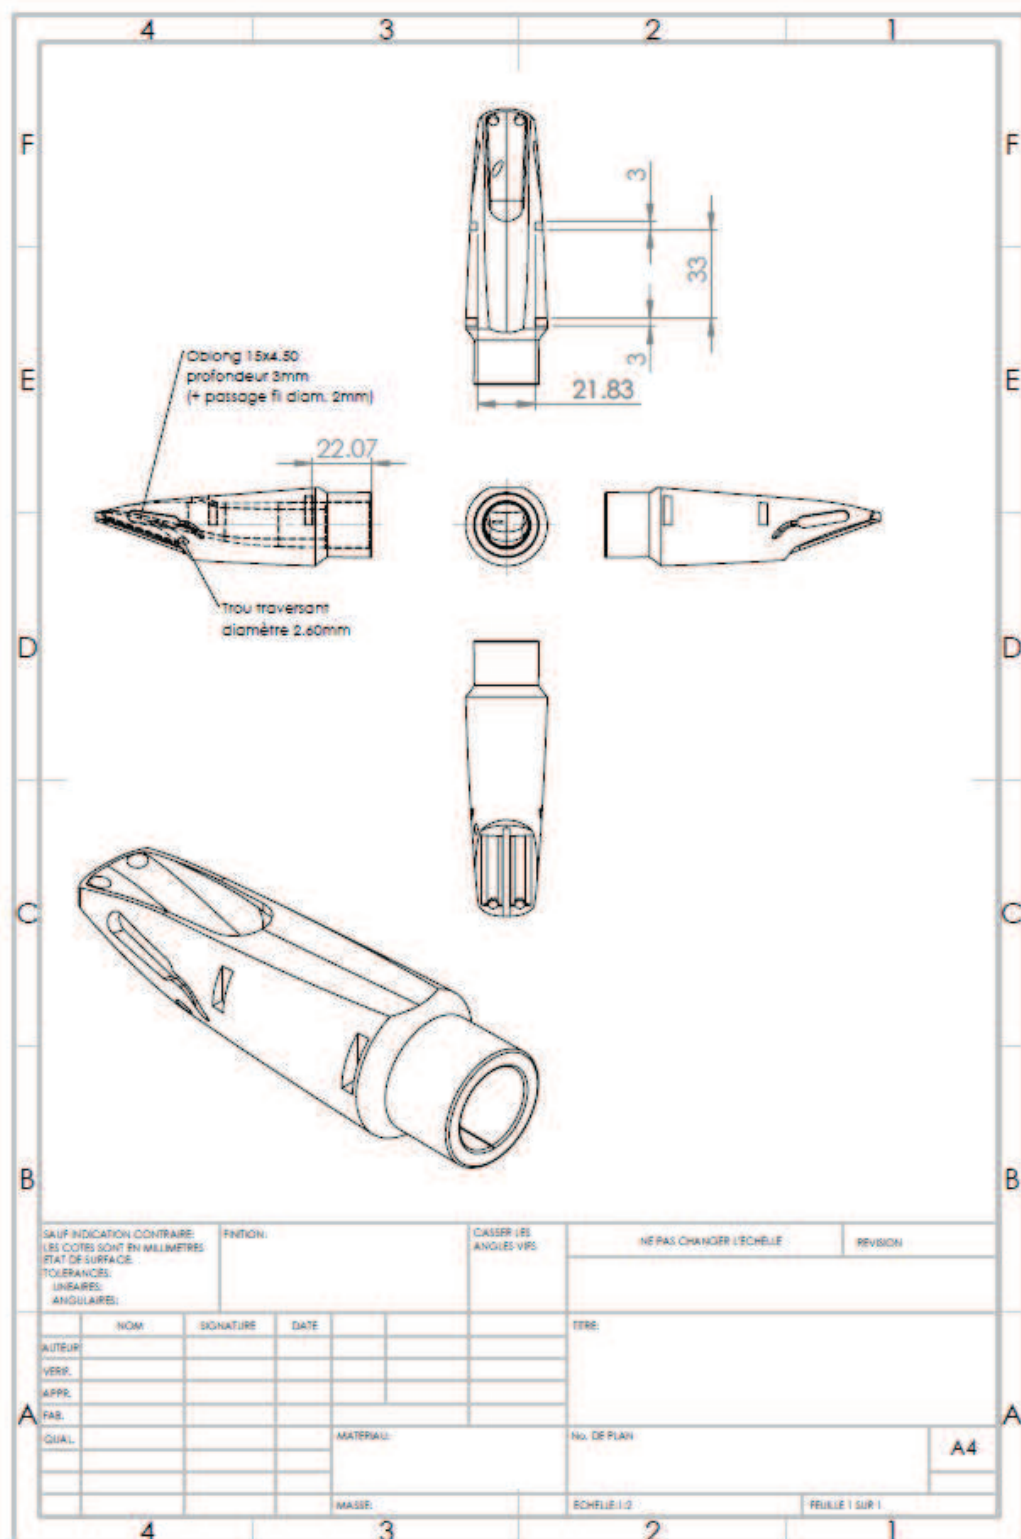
Technical drawing of the mouthpiece. Provided by CTTM.
